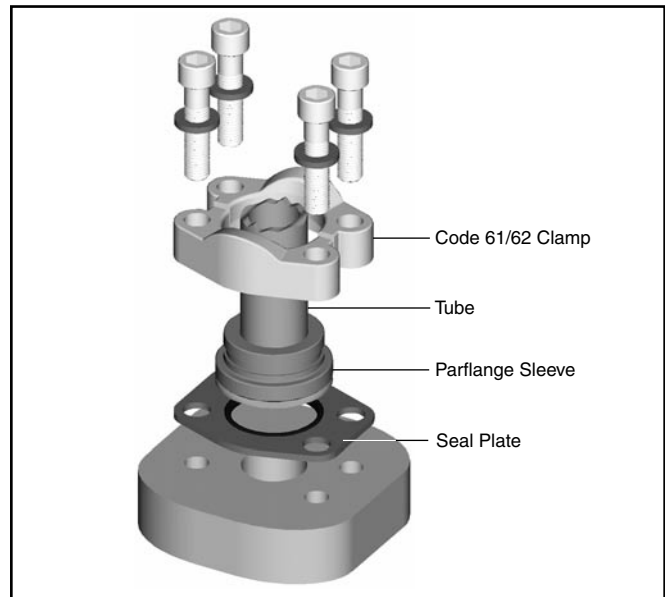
Formed Tube with ISO 6162 (SAE J518) Connection
